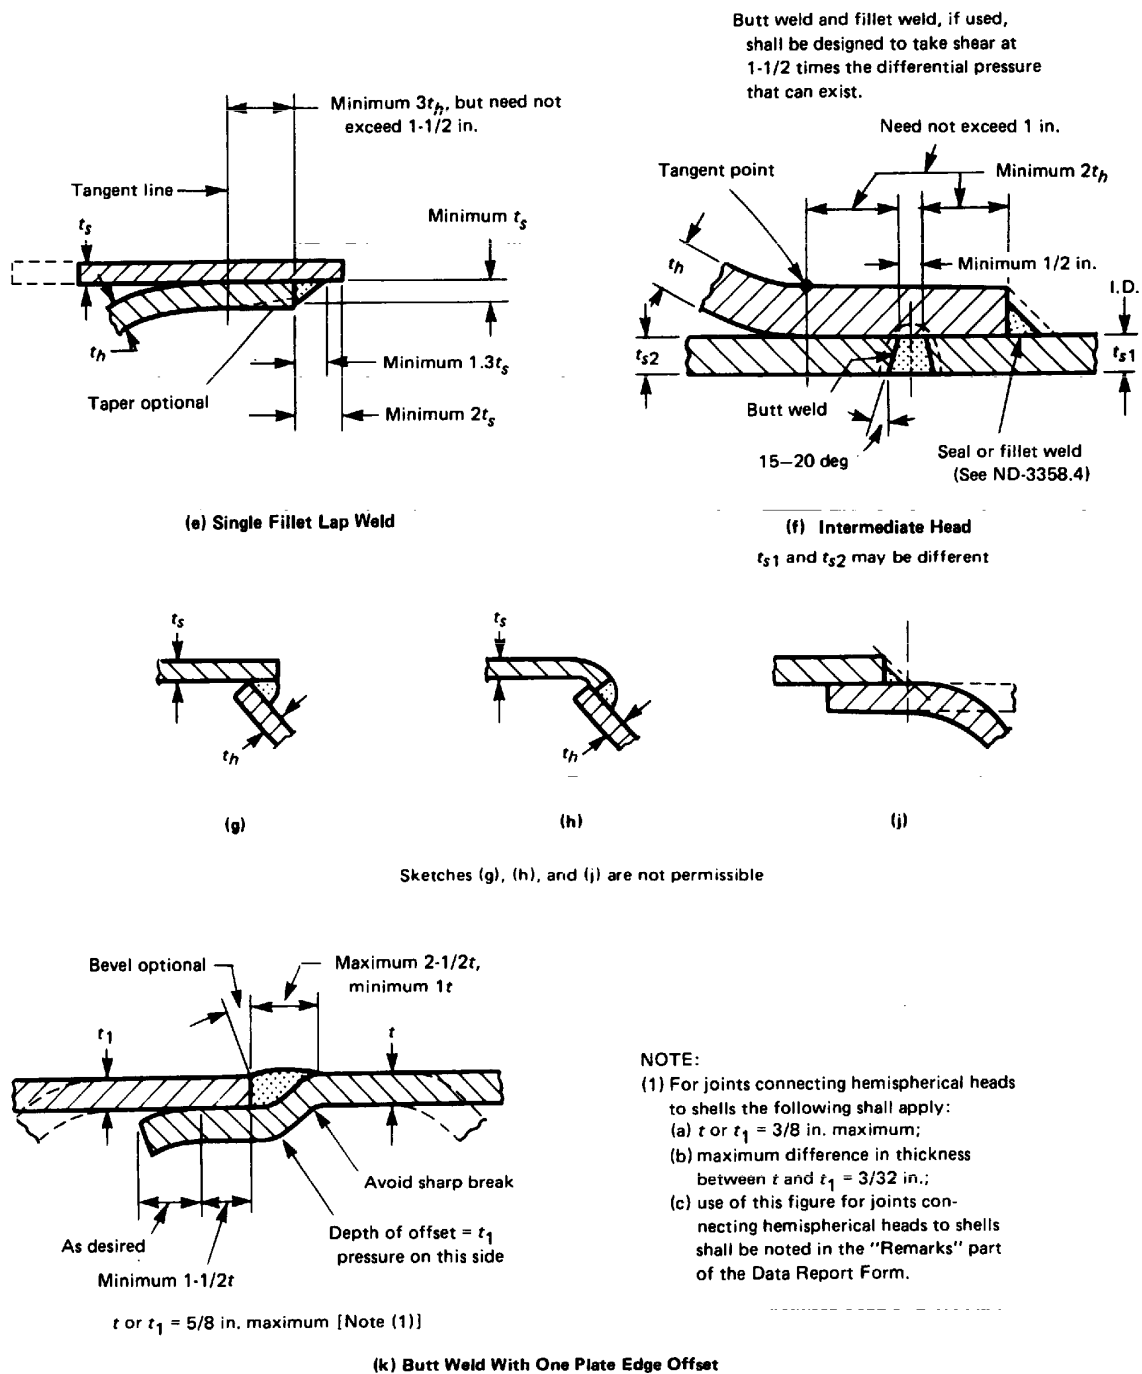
ATTACHMENT WELDS (CONT'D)
